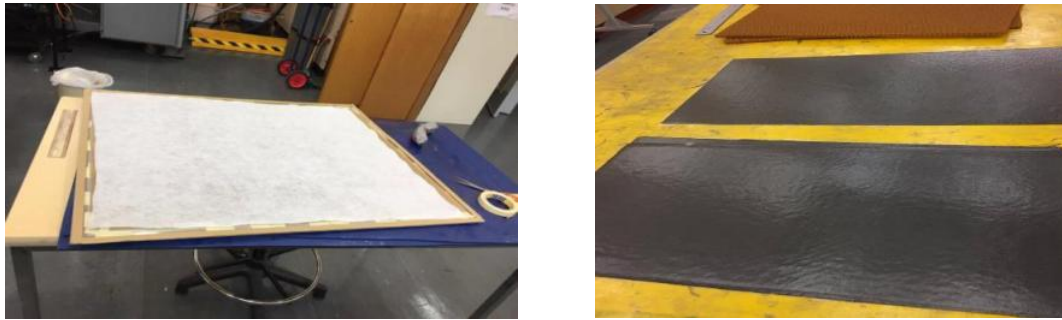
(L) to (R): Picture of Mold Frame and Fabricated CFRP Skins (500 X 275 mm)
